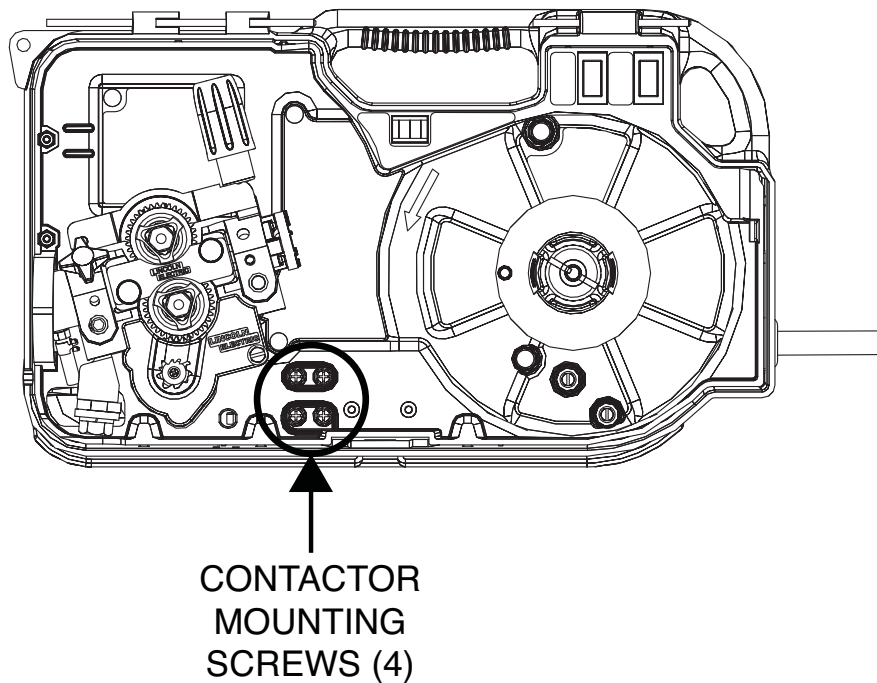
CONTACTOR MOUNTING SCREWS LOCATION
